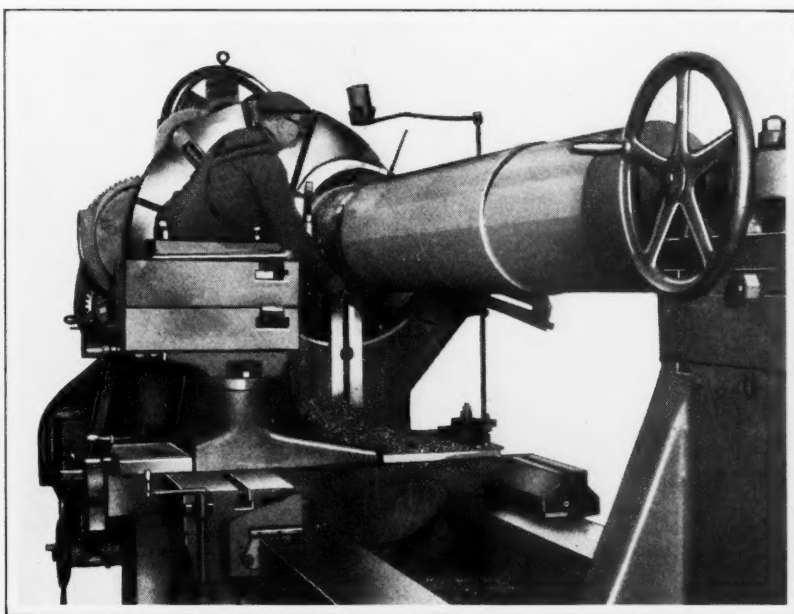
Turning a Heavy Steel Shaft to Receive a Sugar-mill Crusher or Mill Roll
